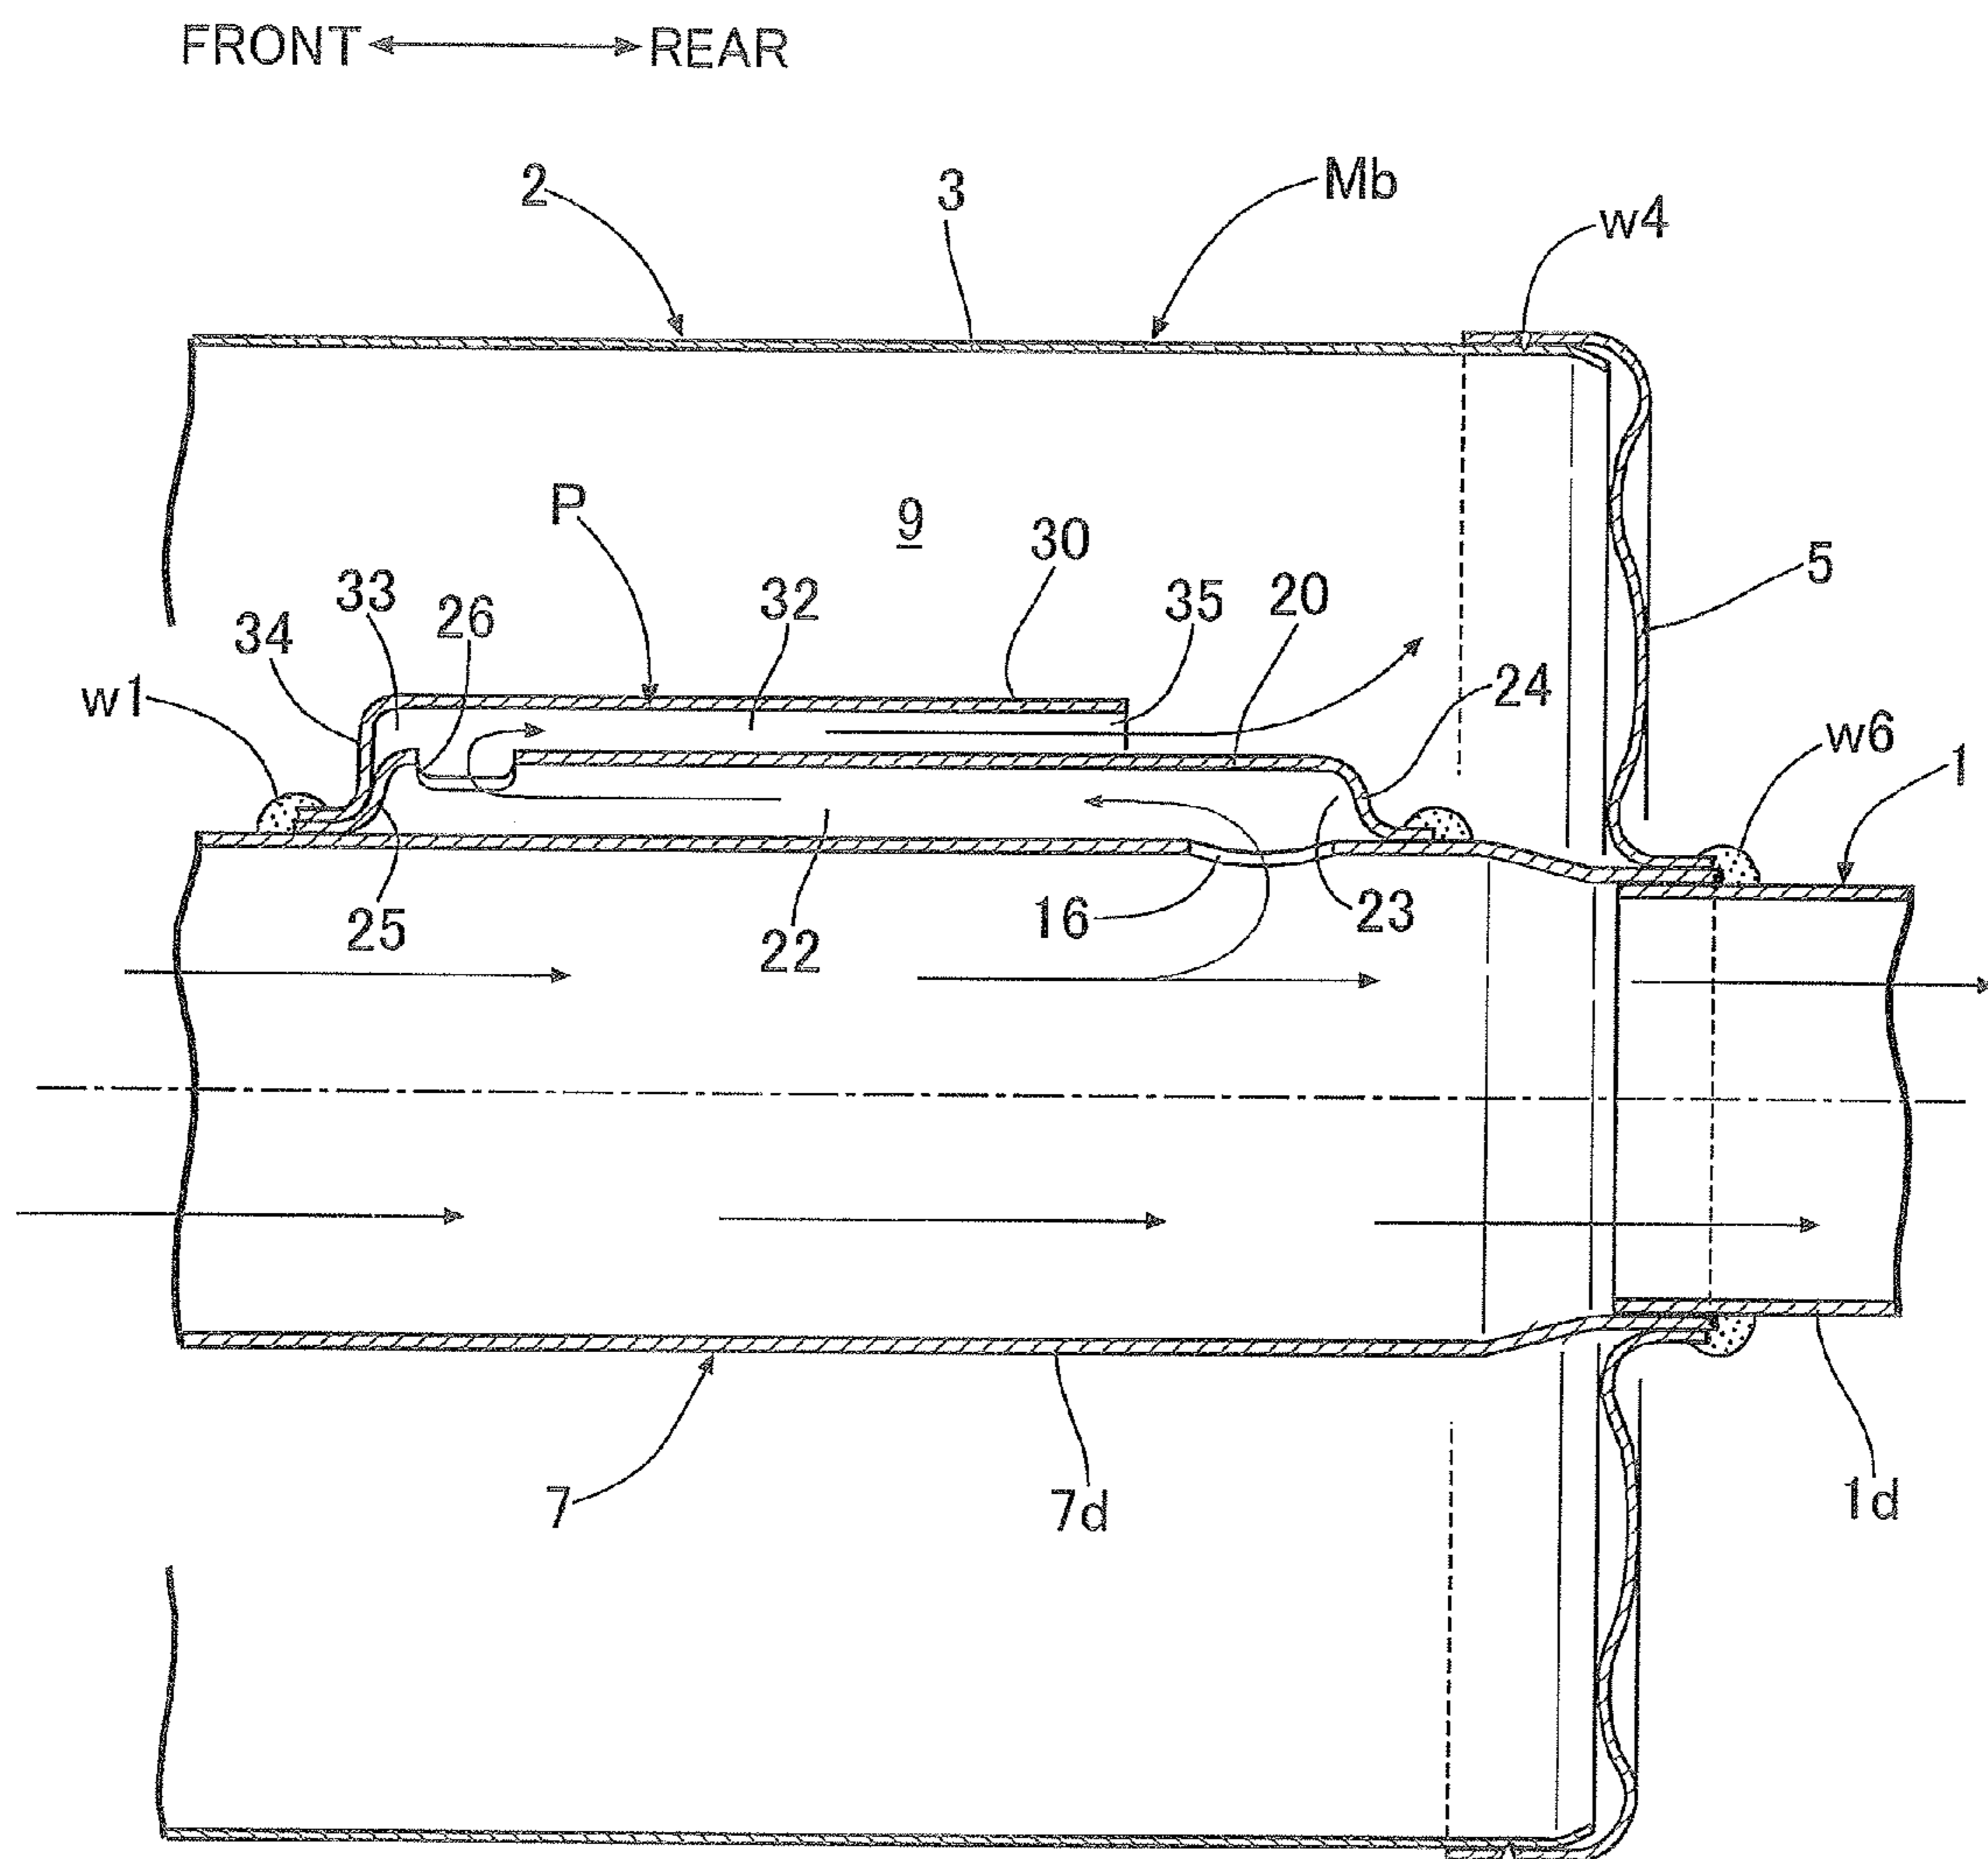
A TEMPORARILY FIX OUTER PASSAGE-FORMING MEMBER 30 AND INNER PASSAGE-FORMING MEMBER 20 BY SPOT-WELDING, AND THEN MIG-WELD THEM (w1) WITH OUTER PERIPHERAL SURFACE OF DOWNSTREAM-SIDE INNER PIPE 7d.
